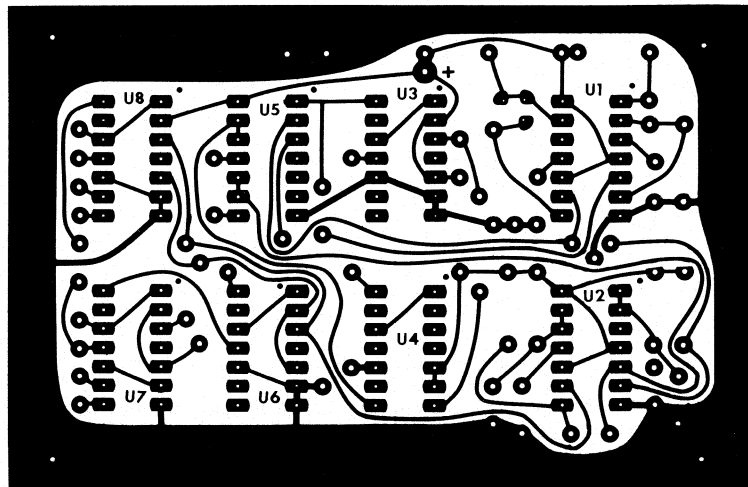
Full-size printed-circuit layout for the Accu-Keyer speed readout. Parts layout is shown in fig. 4.
